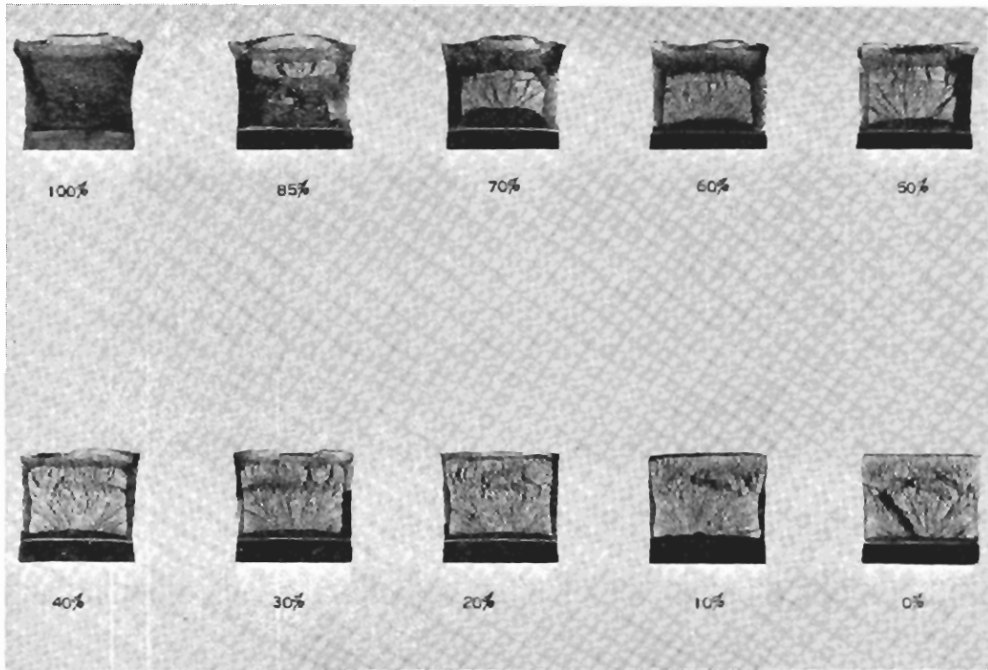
Fracture Appearance Charts and percent Shear Fracture Comparator.
